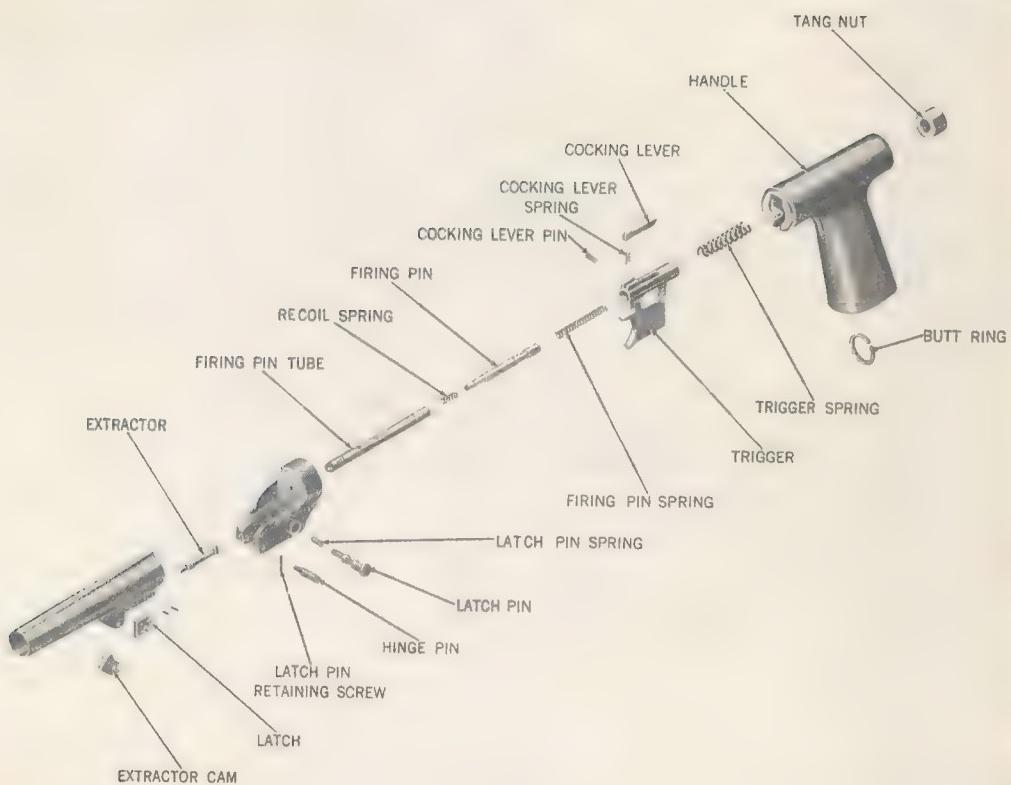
Very Signal Pistol Mk 5 Mod 0, Exploded View.
